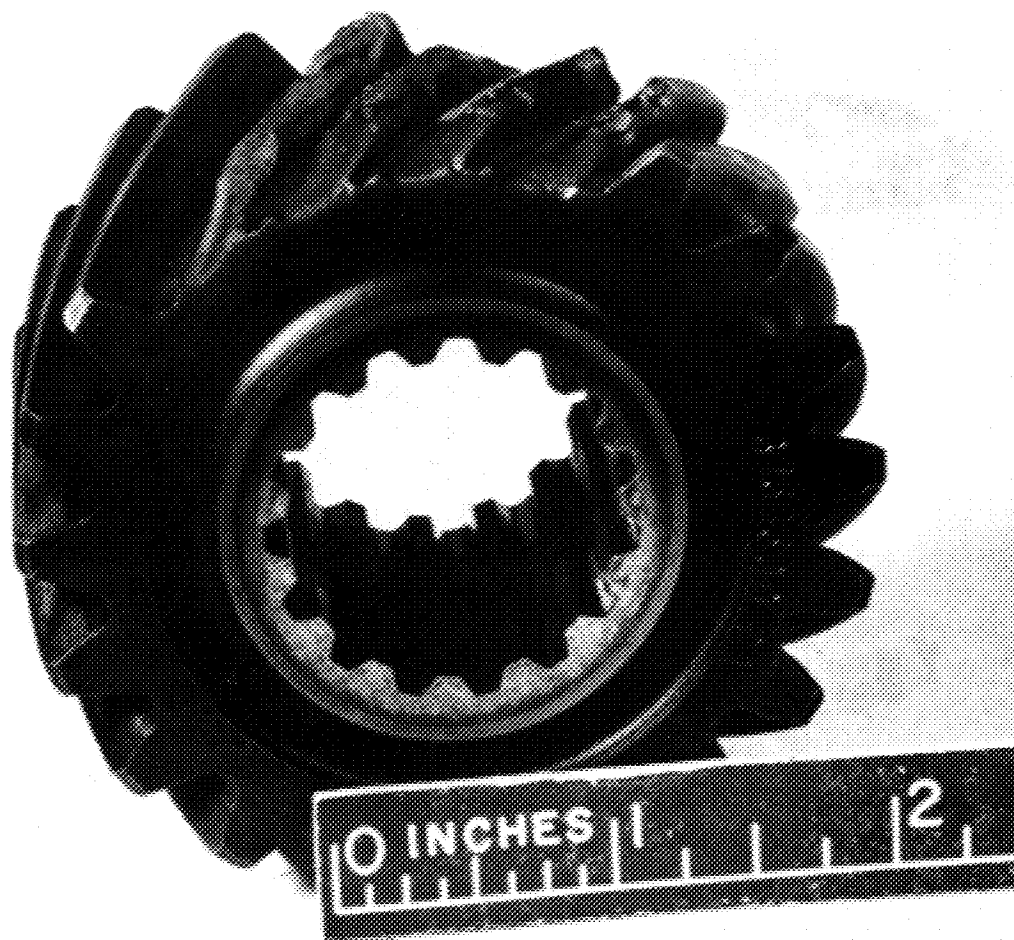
Sheared teeth on transfer input shaft helical gear after transmission overheated during full load cooling runs (02DU8670).
